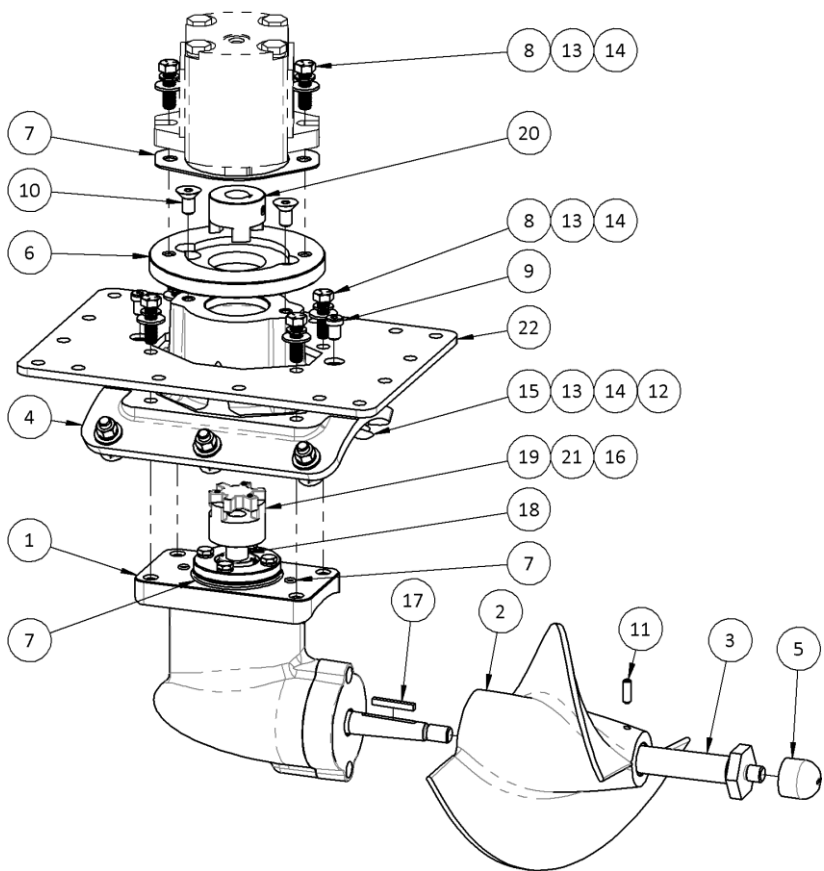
Transom Mounted KP08/KP10 Hydraulic Thruster Parts List Diagram
